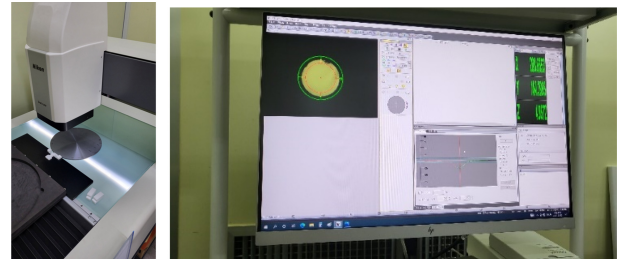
Method for measuring micro hole diameter using existing inspection equipment
